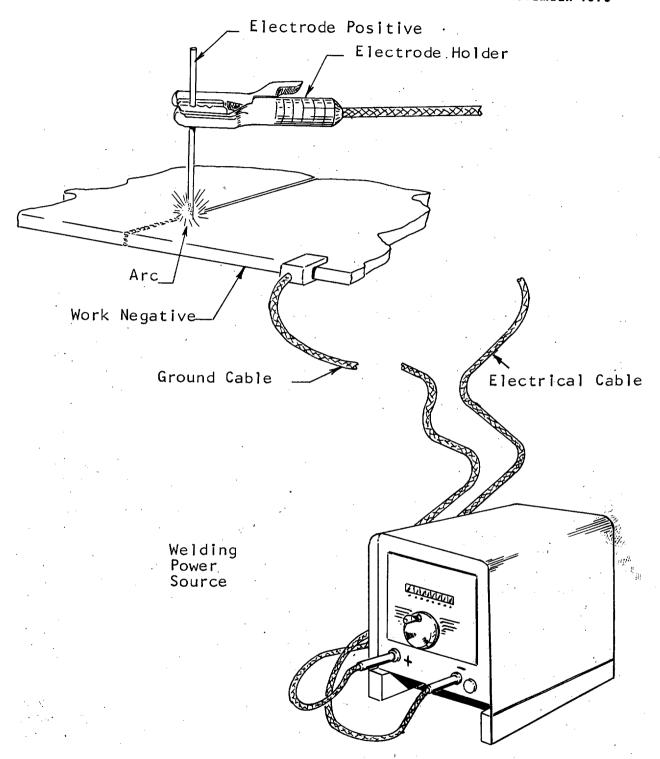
The Shielded Metal-Arc Welding Circuit (Reverse Polarity Operation)
